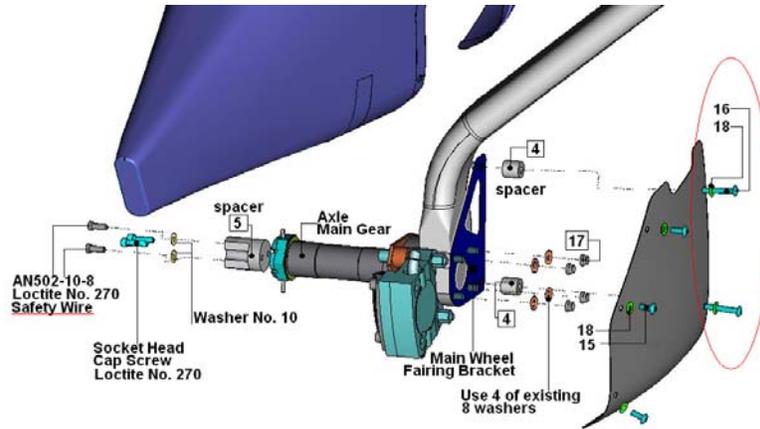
Exploded View of Main Wheel Fairing, Port
